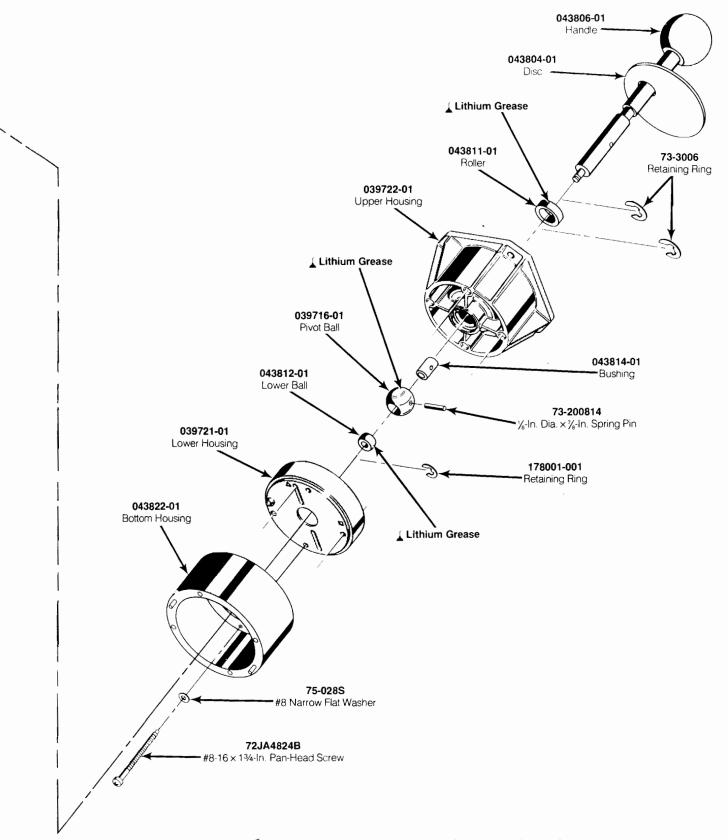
Rotary Control Assembly, Continued A043820-01 C
